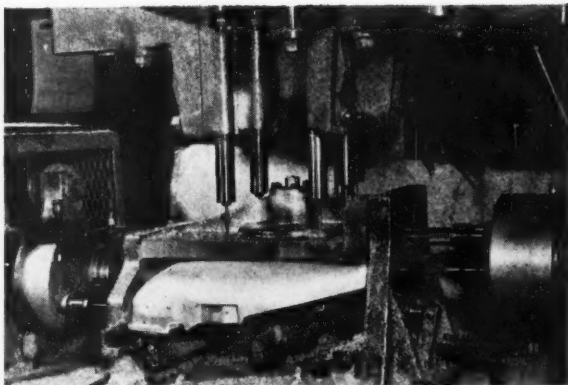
Closeup view from rear of milling operation on agitator pocket.
